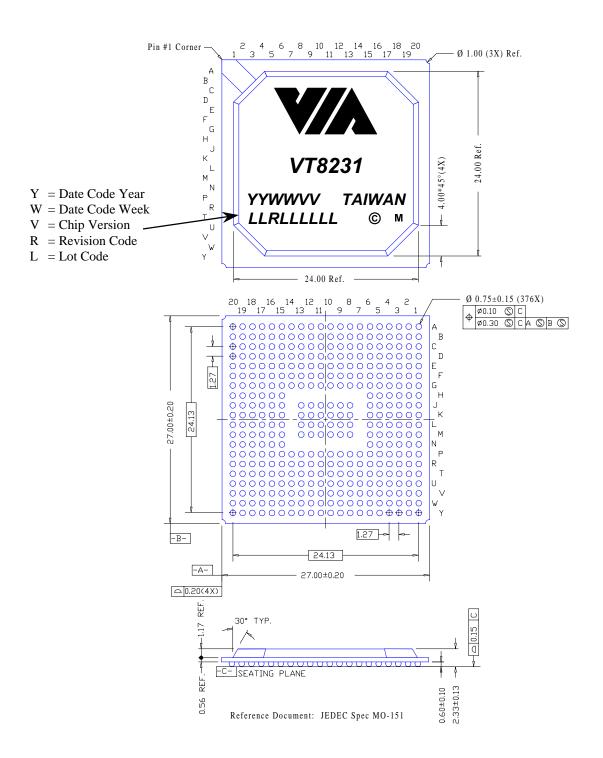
Mechanical Specifications – 376 Pin Ball Grid Array Package
